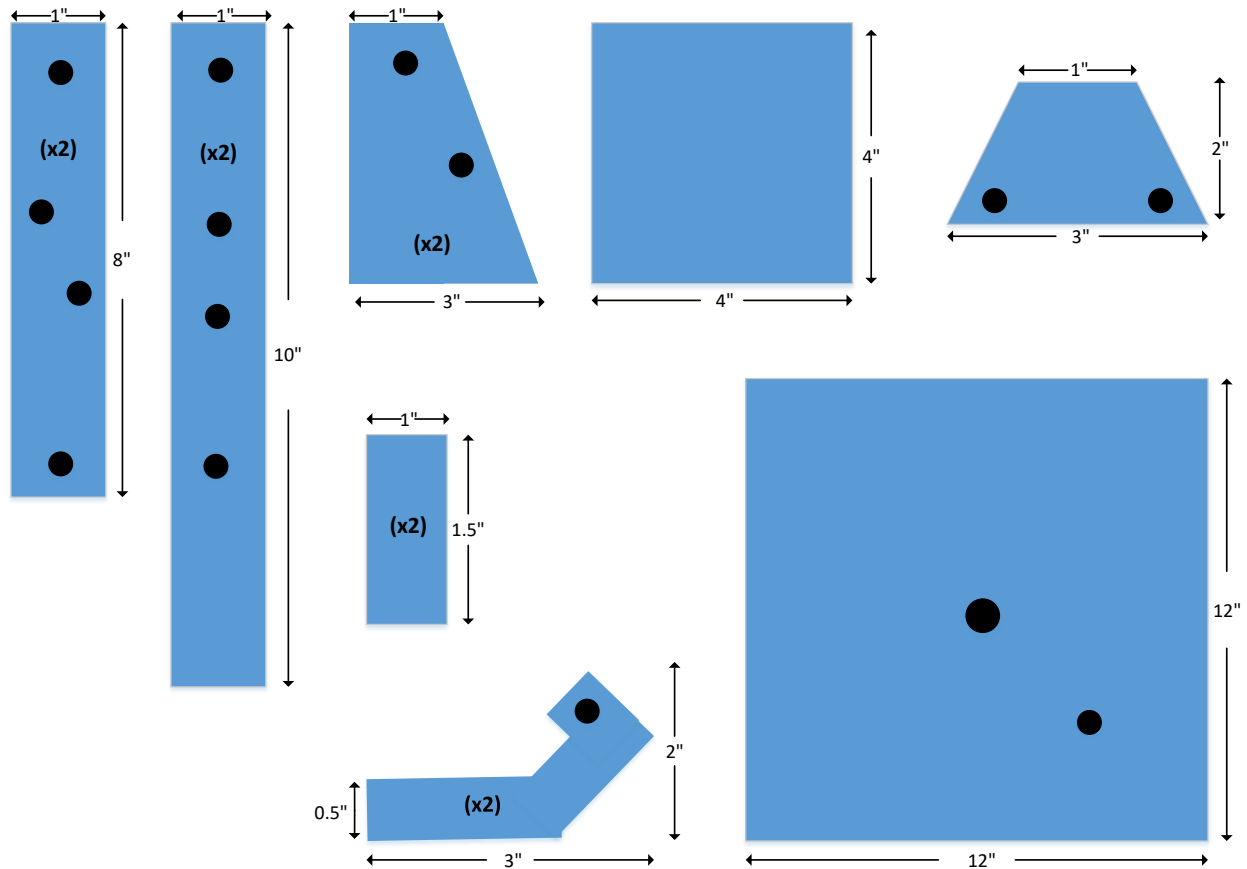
Hydraulic claw particle board pieces. Dimensions and the number of pieces are indicated on each piece. The black dots indicated holes where the wooden dowels were placed.
